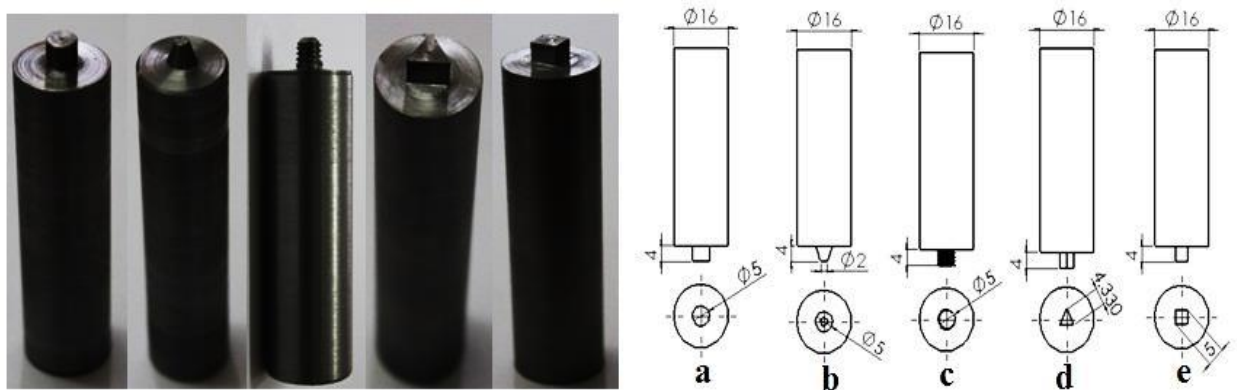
FSP tool pin profiles: (a) straight cylindrical, (b) taper cylindrical, (c) threaded cylindrical, (d) triangular, and (e) square
